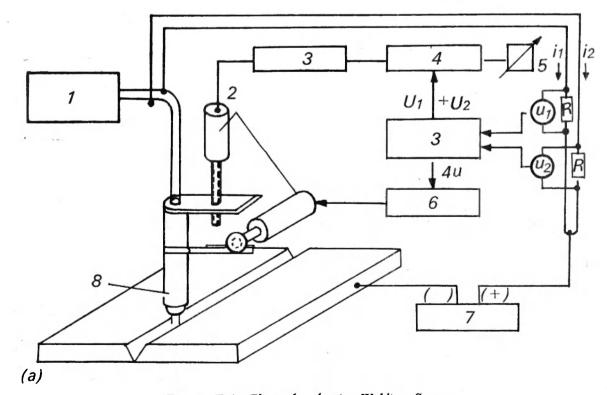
Twin Electrode adaptive Welding System.
